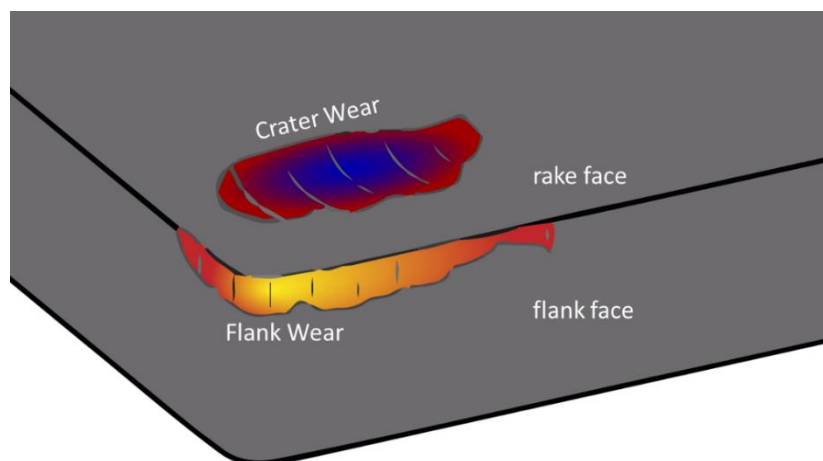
Schematic of a cutting tool with crater wear and flank wear.
